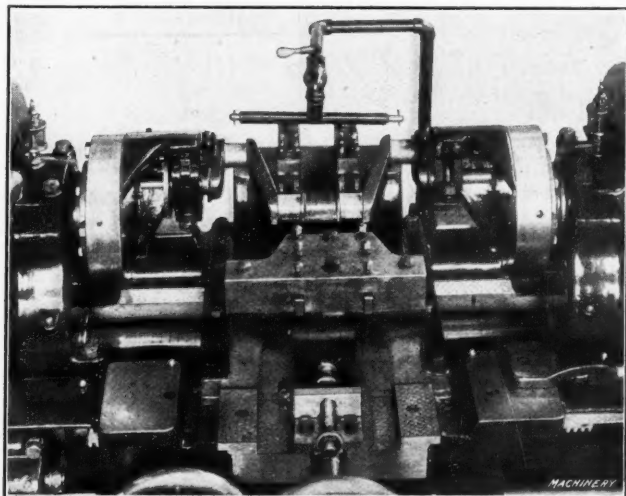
Type B Machine tooling up for turning Inside Crank-pins
